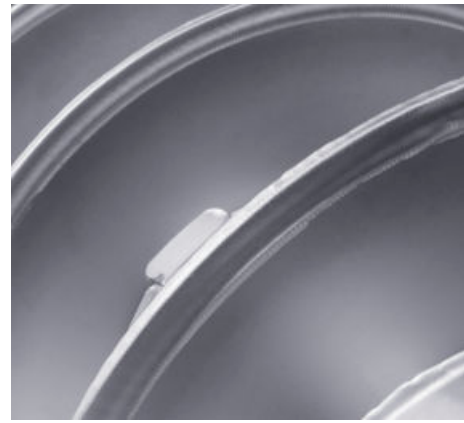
Flame sprayed tungsten carbide wear protection on conveyor flights
